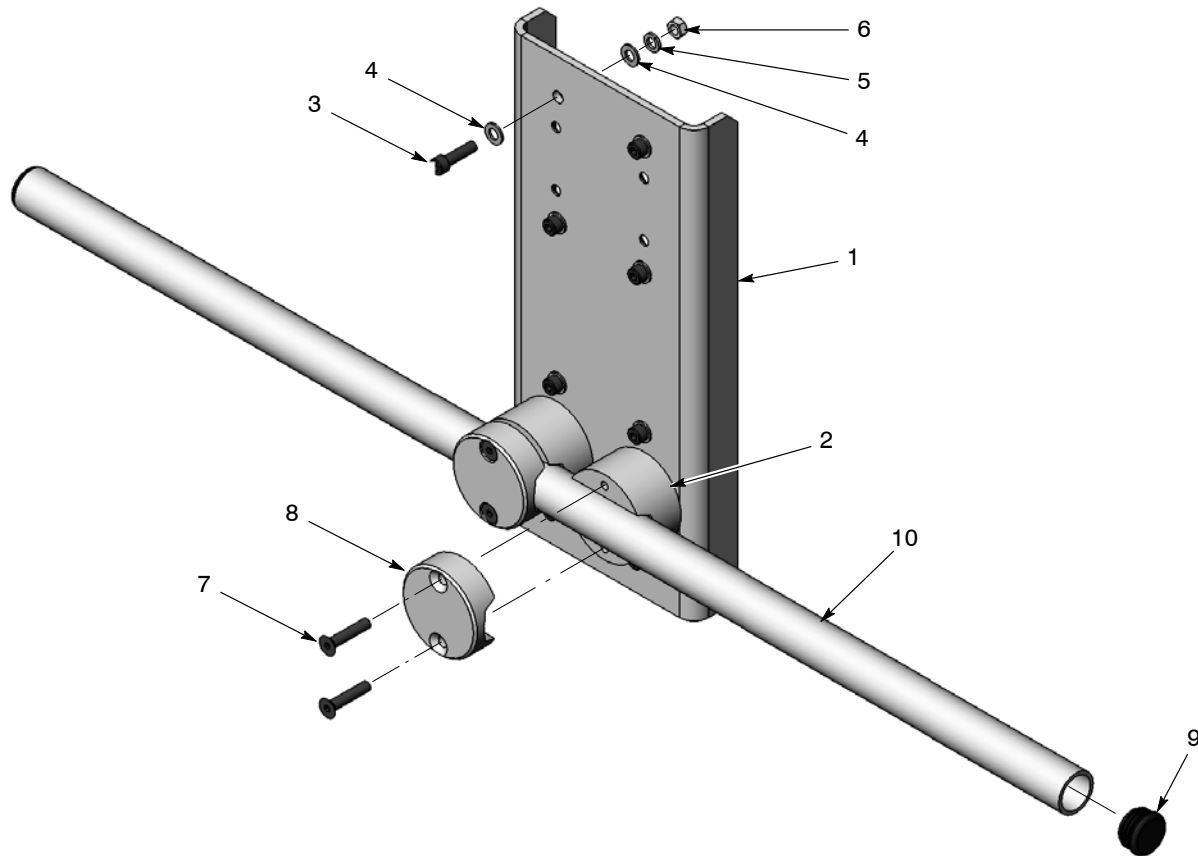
Single Horizontal Bar Gun Support Kit Assembly
